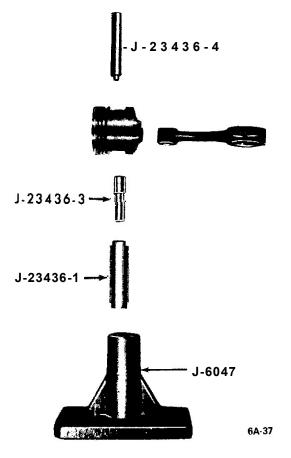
A-37 Piston Pin Installation Tool Layout - 1.9 Engine
